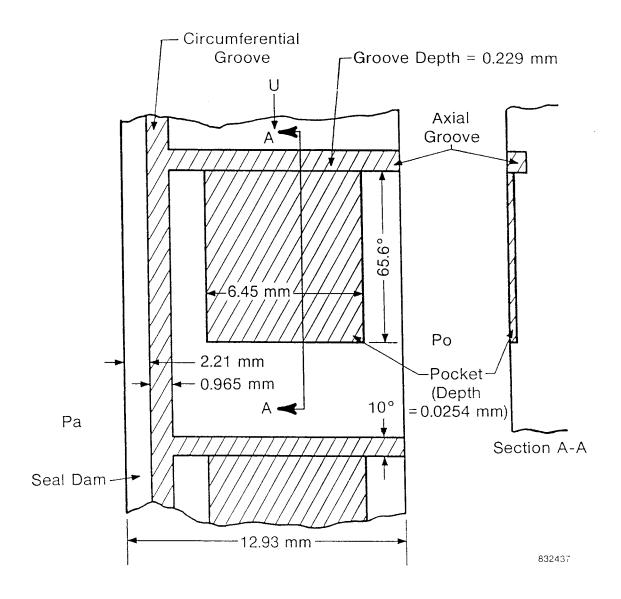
Developed View of 50-mm Rayleigh-Step Pad
